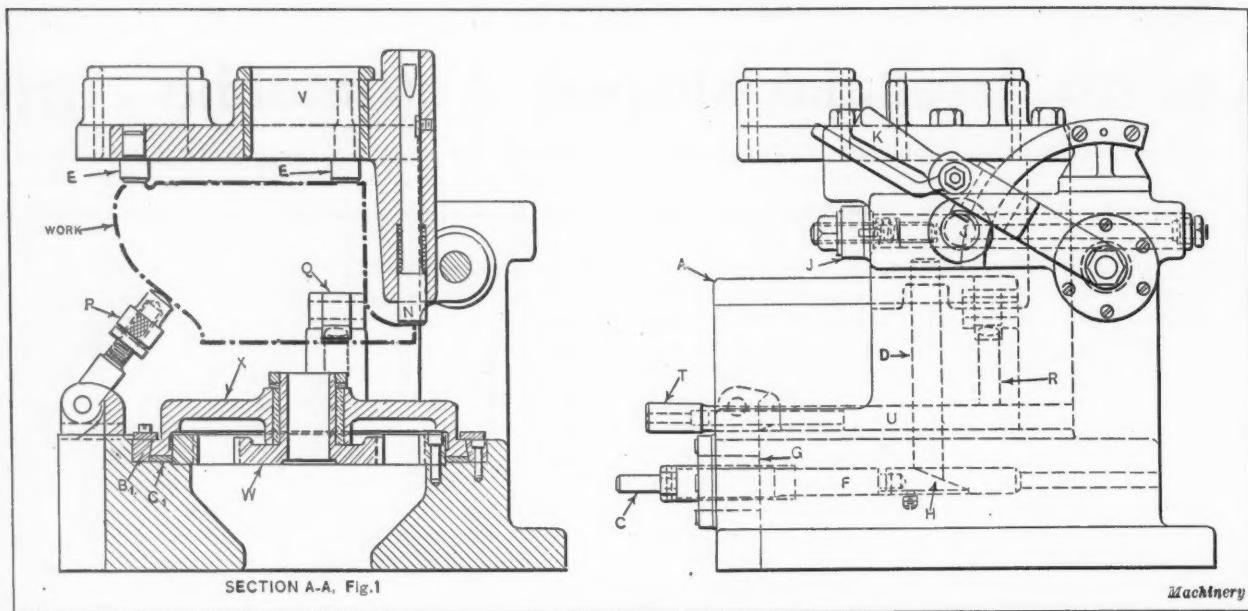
Sectional and End Views of the Flywheel Housing Jig illustrated in Fig. 1
